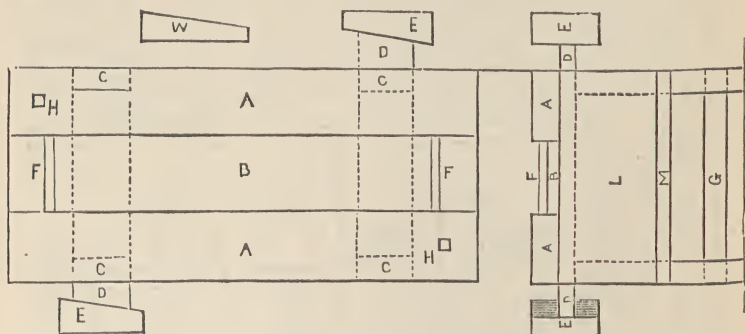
LAWS' BENCH. (1) PLAN LOOKING UP. (2) END ELEVATION.
